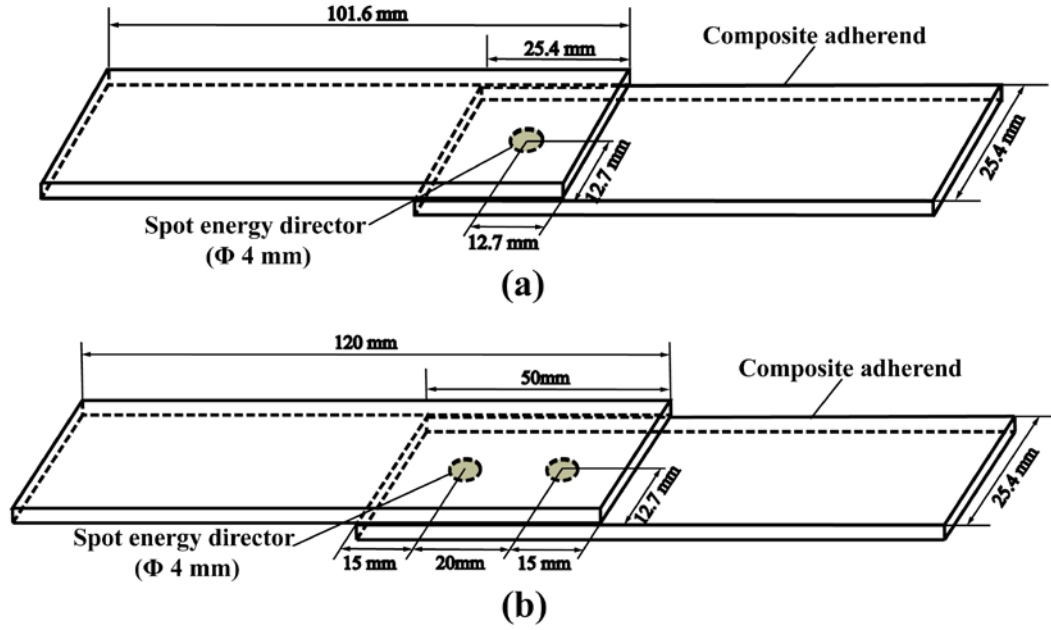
Schematic of (a) the single-spot welded joints and (b) the double-spot welded joints used in this study. The grey dashed ellipses indicate the locations of the spot energy directors. Dimensions are not to scale.
